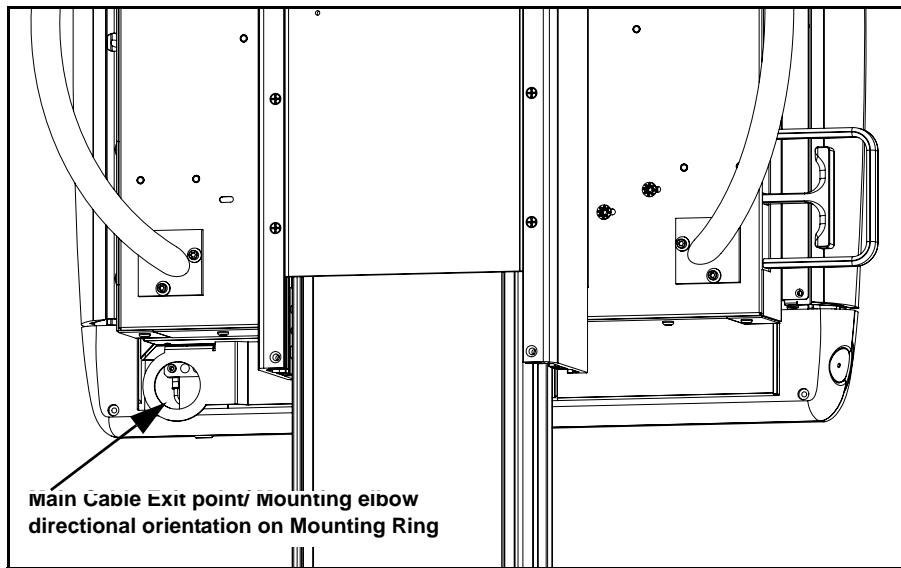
A-3. CMT Main Cable Exit point / Mounting Elbow direction choices.
